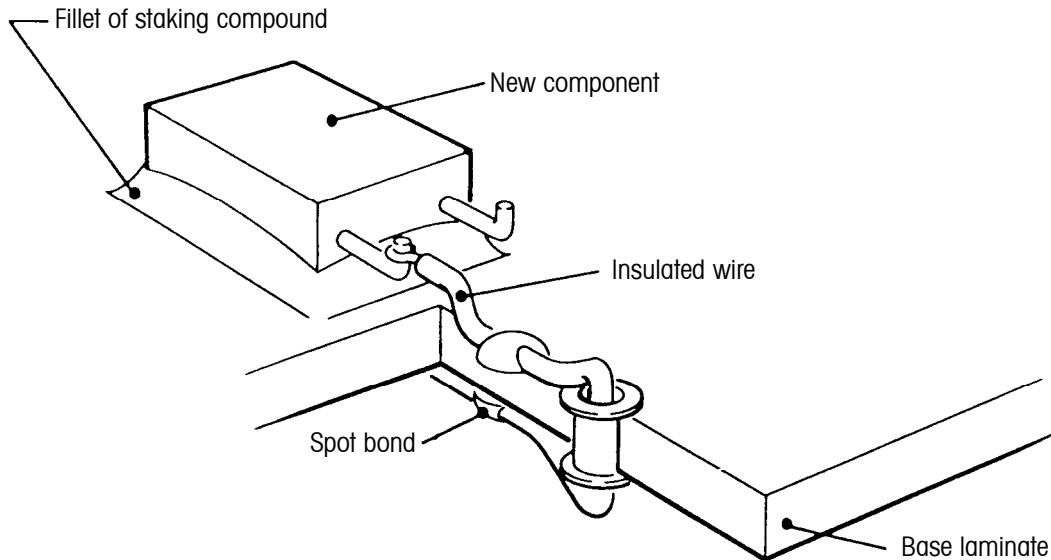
Mounting of additional non-axially leaded components, e.g. capacitors, with wire connecting top or bottom sides of the circuit board using staking compound (on reverse side or on component side of board)
